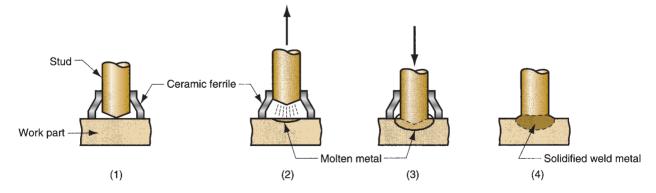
Stud arc welding (SW): (1) stud is positioned; (2) current flows from the gun, and stud is pulled from base to establish arc and create a molten pool; (3) stud is plunged into molten pool; and (4) ceramic ferrule is removed after solidification.
